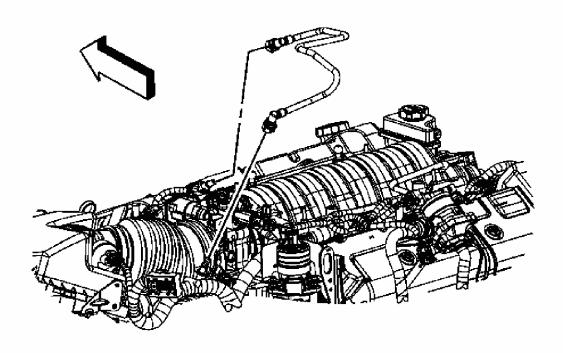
Identifying PCV Fresh Air Tube Courtesy of GENERAL MOTORS CORP.
